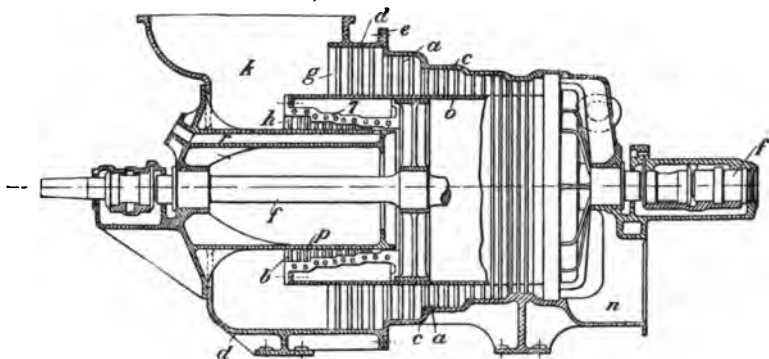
Parsons Arrangement of Telescoping Reversing Turbine within Main Turbine.
